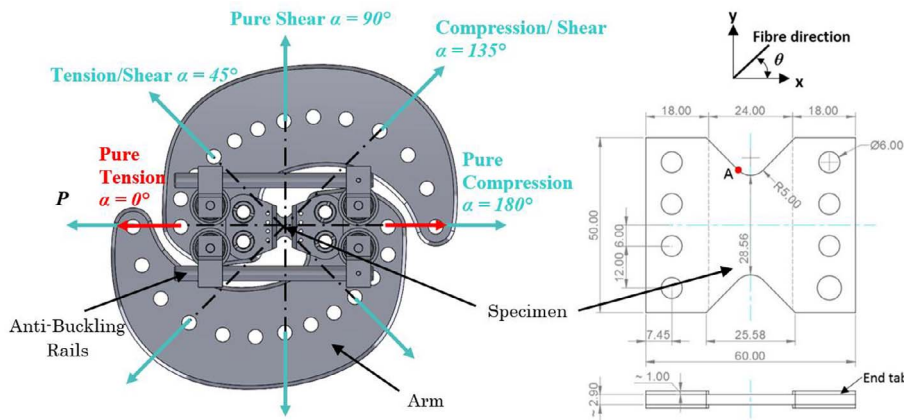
The Modified Arcan Fixture (MAF) and the dimensions of the butterfly specimen.
